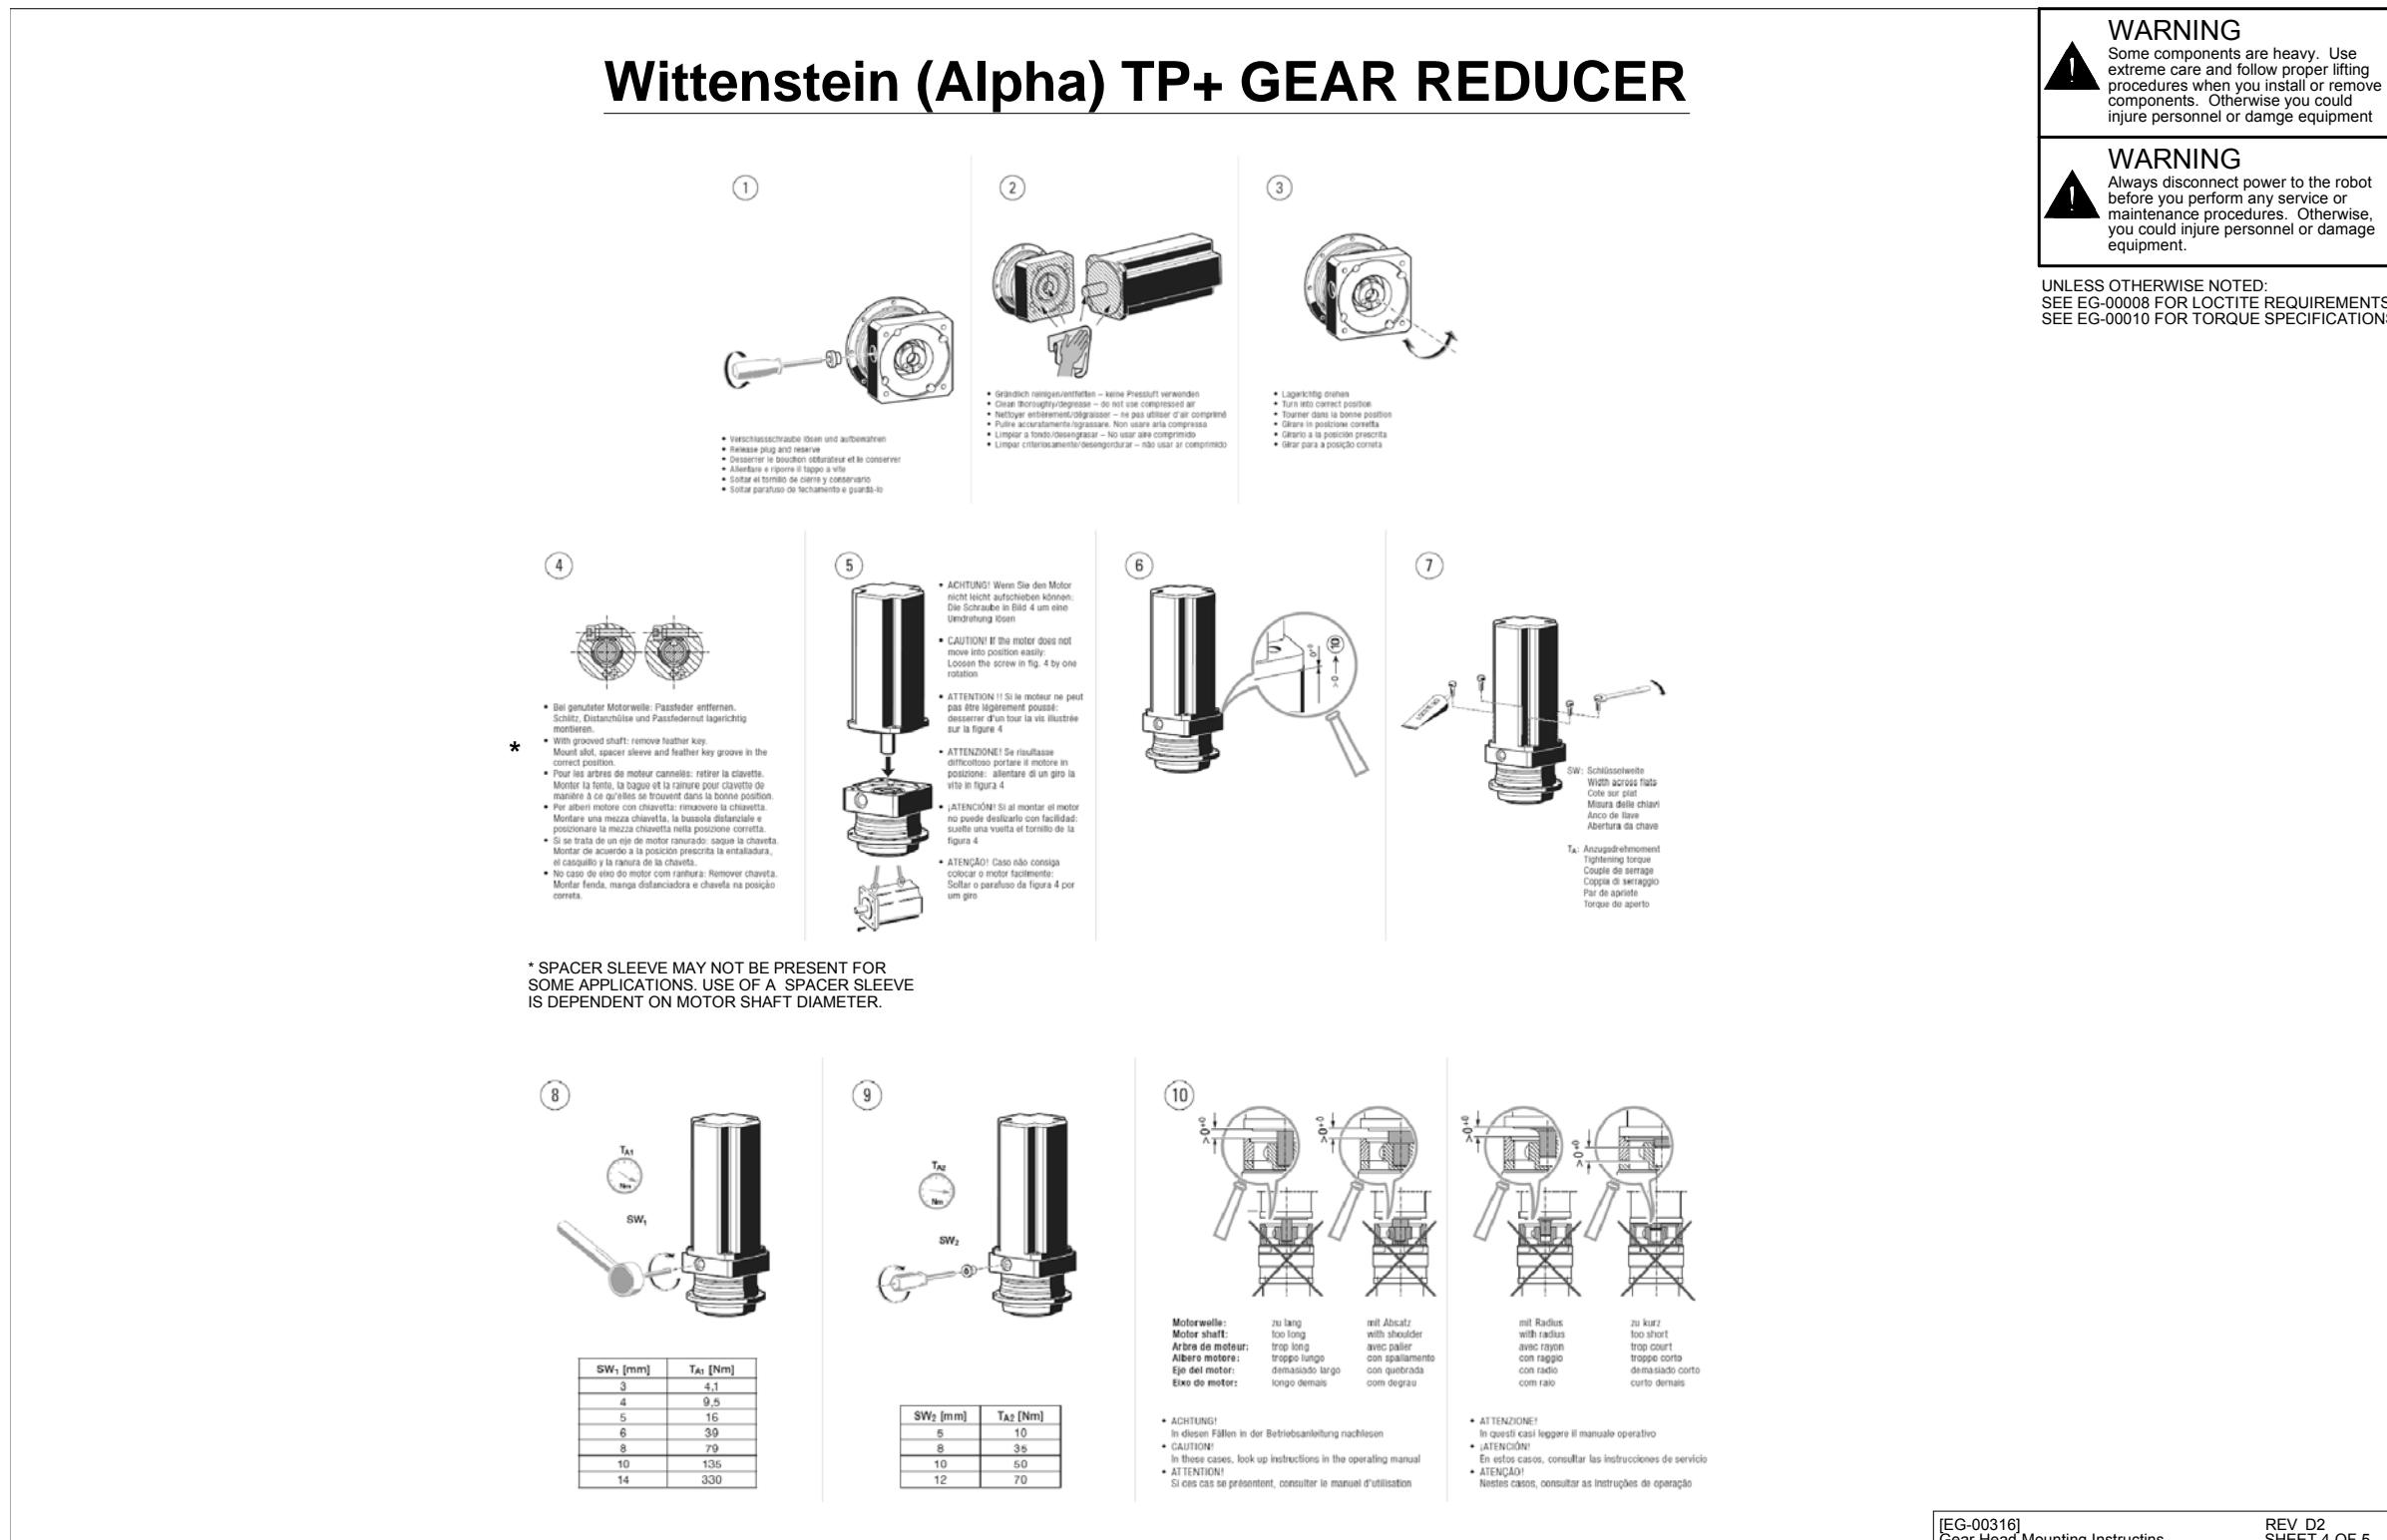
EG-00316 Sheet 4 of 5, Gear Head Mounting Instructins
